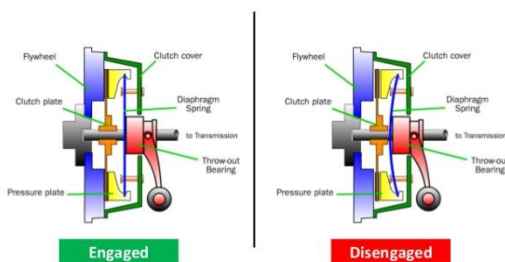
Clutch Engaged & Disengaged Single Clutch Plate
